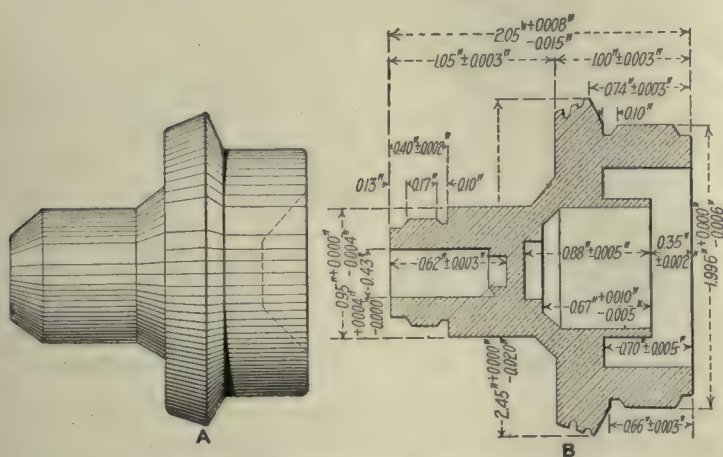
DIMENSIONS OF 3-IN. CASE-PRIMER BODY
